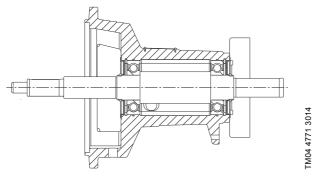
Bearing bracket with closed, greased-for-life bearings
